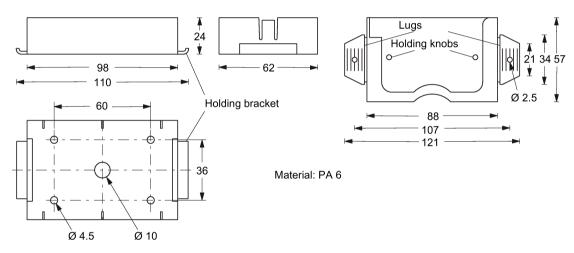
Dimension drawing of spacer 6GT2190-0AA00 with fixing pocket 6GT2190-0AB00
